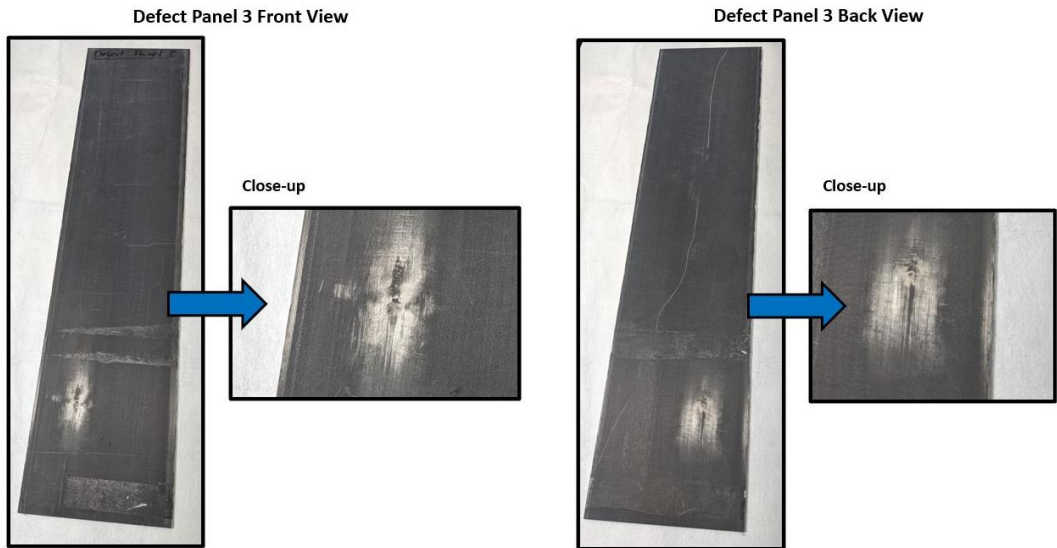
Defect panel 3 photographs with defects highlighted.
